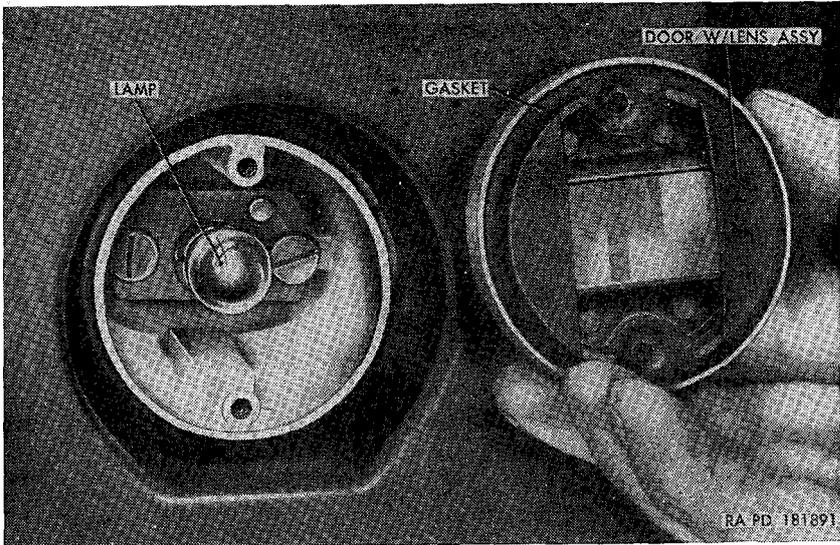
Signal blackout marker and service parking light assembly—door removed.
